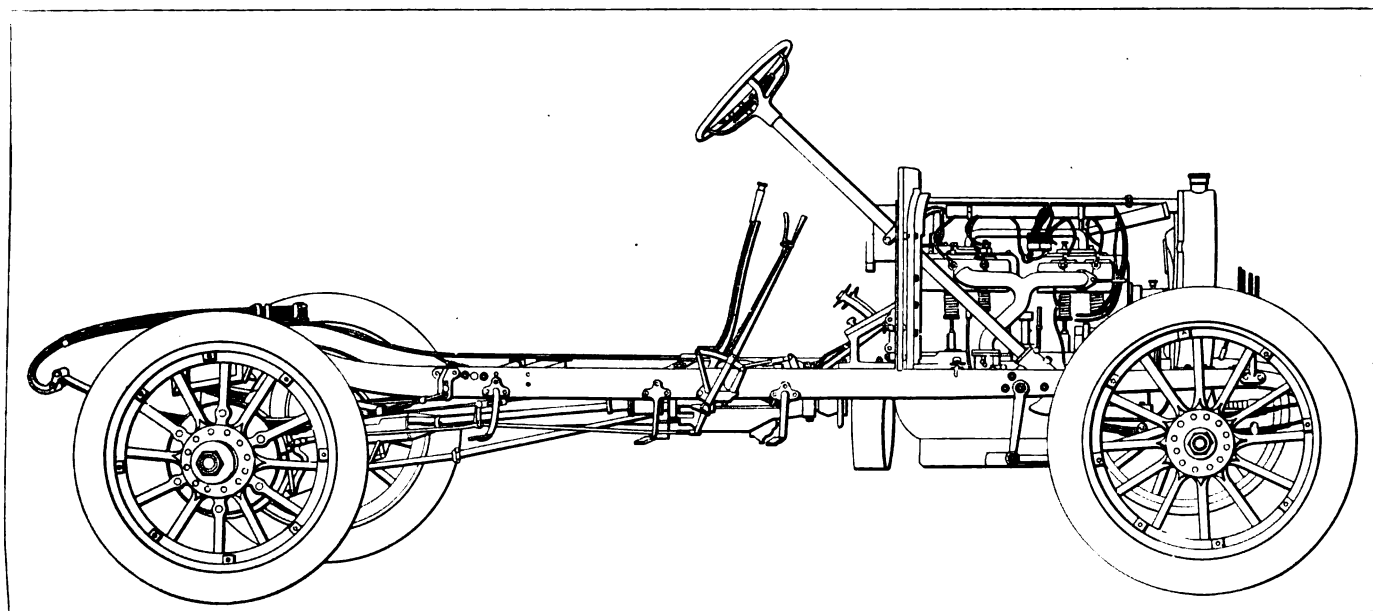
Chassis of the 40-horsepower Corbin, showing the intake side of motor, steering equipment and substantial design of transmission and suspension
